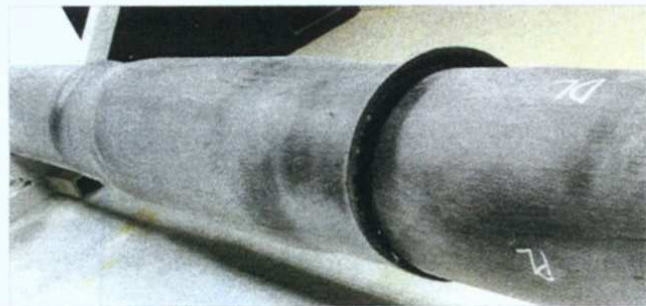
Thermo-shrinkable tube joint sleeve radiational cross-linked with thermo-shrinkable bands, 100 cycles, tight after test
